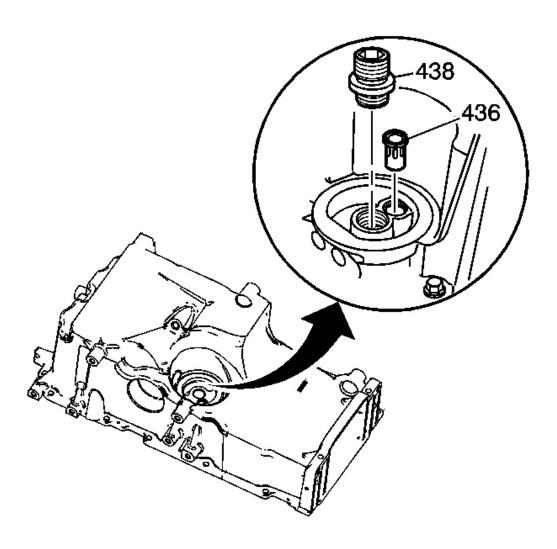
Oil Filter Fitting & Bypass Valve Courtesy of GENERAL MOTORS CORP.
